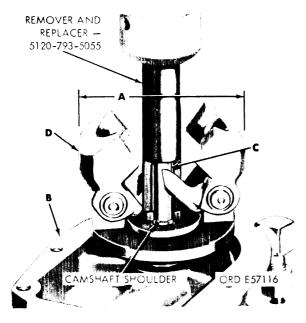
Checking extreme open position of governor weight and spider assembly and installing assembly using remover and replacer.
